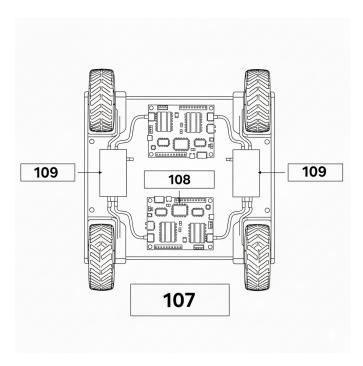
Underside view of the SpyBot robot. (107: Battery, 108: Motor Driver, 109: DC Motors)
